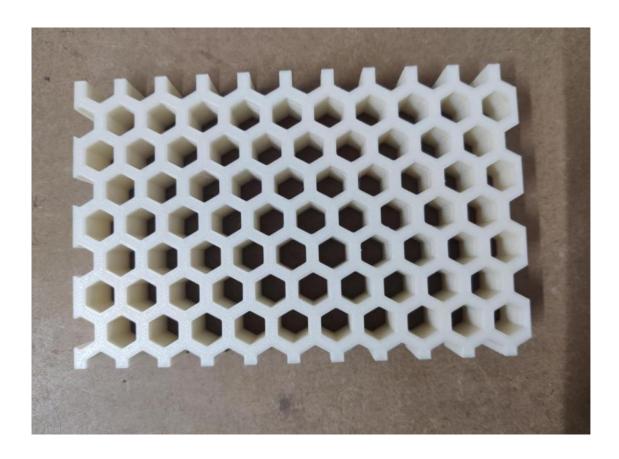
PLA honeycomb core dimensions of 150mm*100mm*20mm
